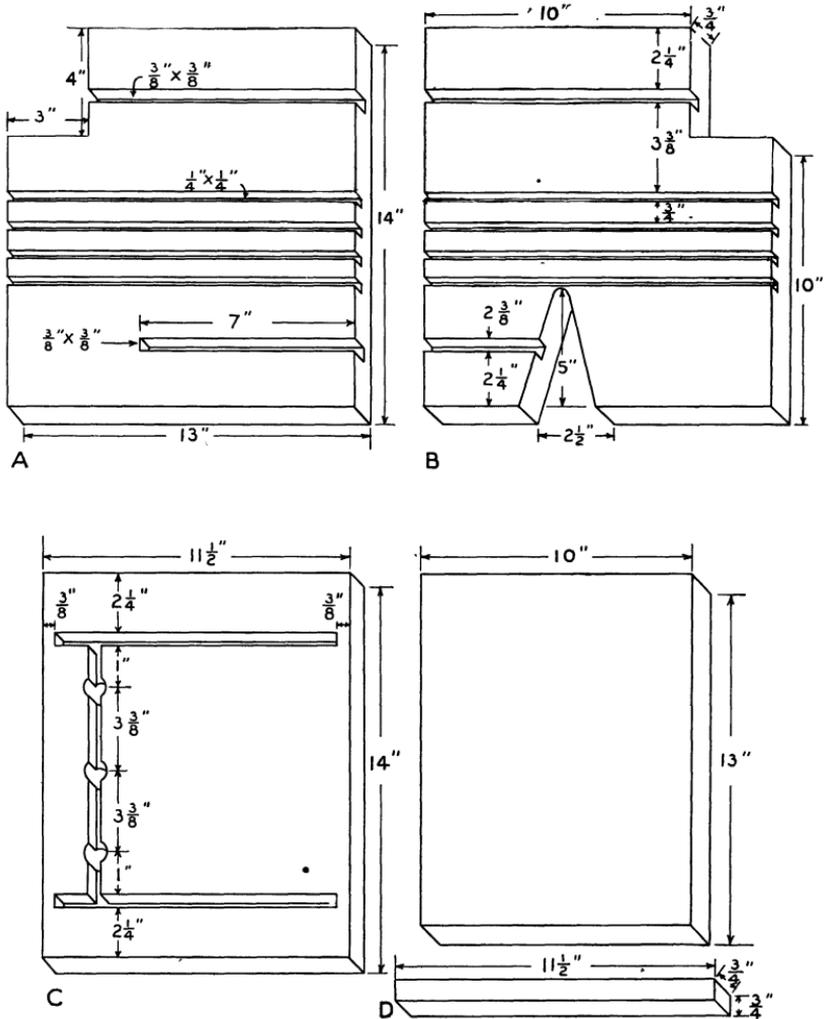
Detailed drawings showing the dimensions and construction of certain parts of the photographic light box: A, Front; B, back; C, left side; D, bottom
